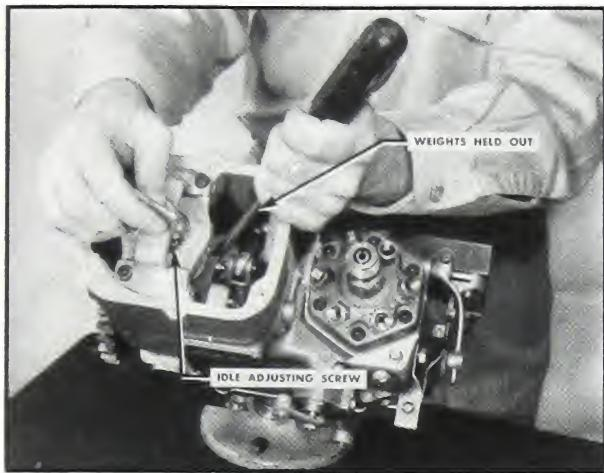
Turn down governor idle adjusting screw drop in engine torque.
